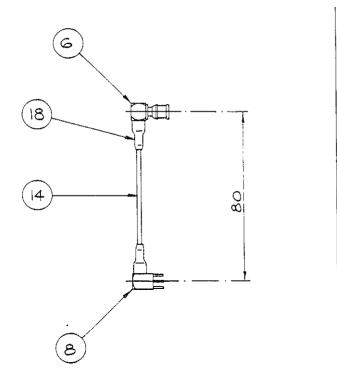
F Bracket Assembly R-11-1728 Rev. 1
